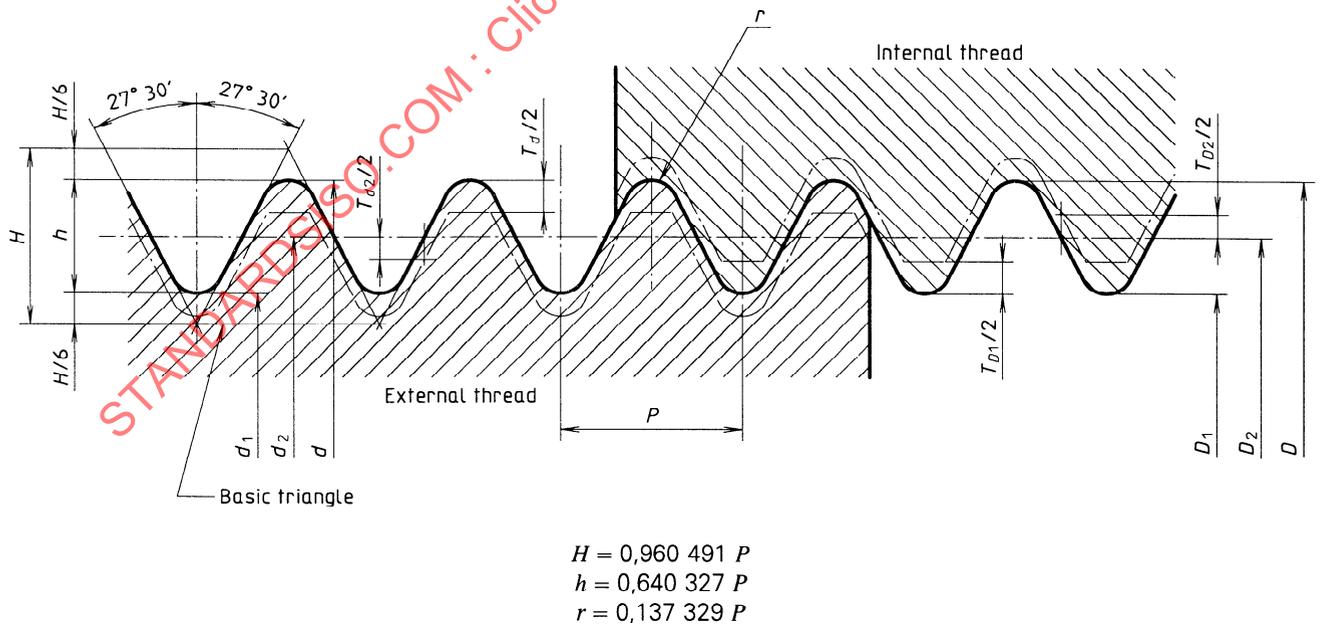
Truncated form thread profile and tolerance zones
